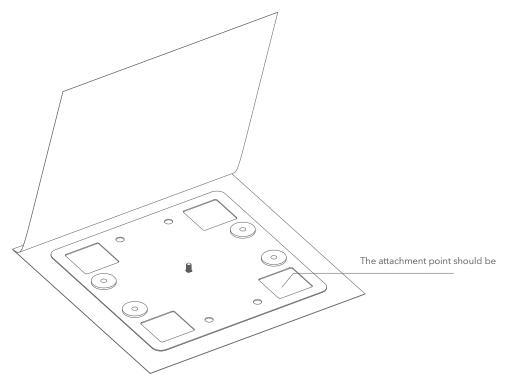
Welding the diaphragm at the attachment points.
